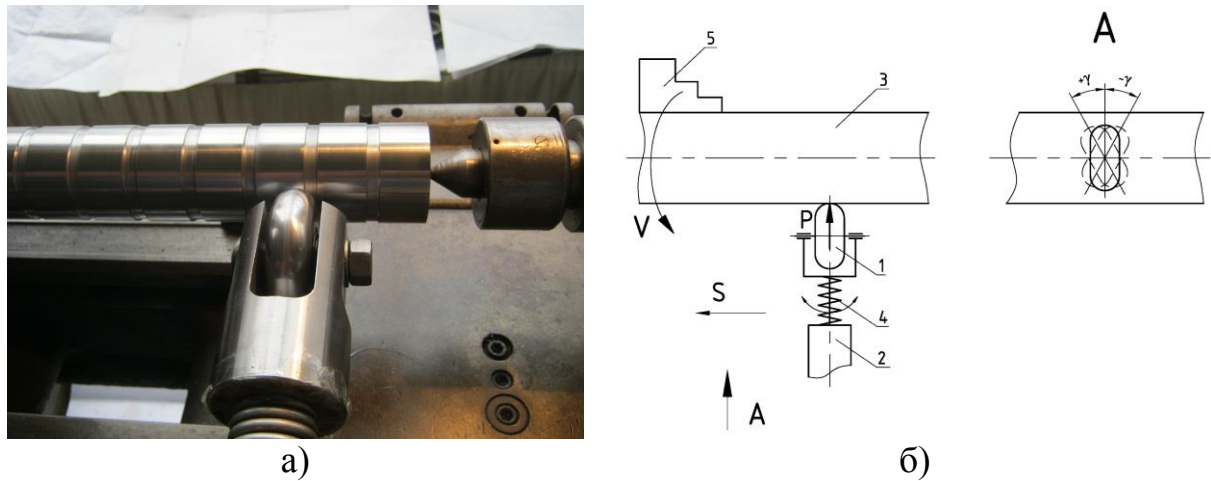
General view (a) and scheme of experimental equipment (b) during rolling
